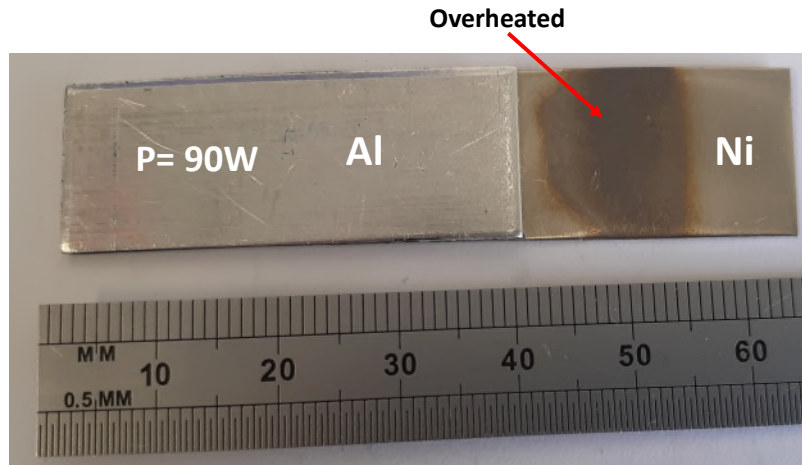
Condition of laser welded Ni tab to Al busbar (bottom view) after passing 200 A current for 30 s
